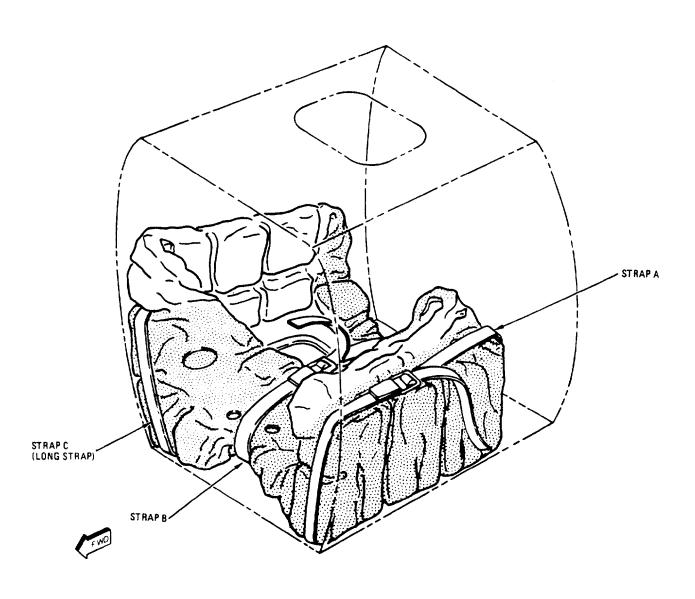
Removal - No. 2 Fuel Tank Folding (Sheet 5)
